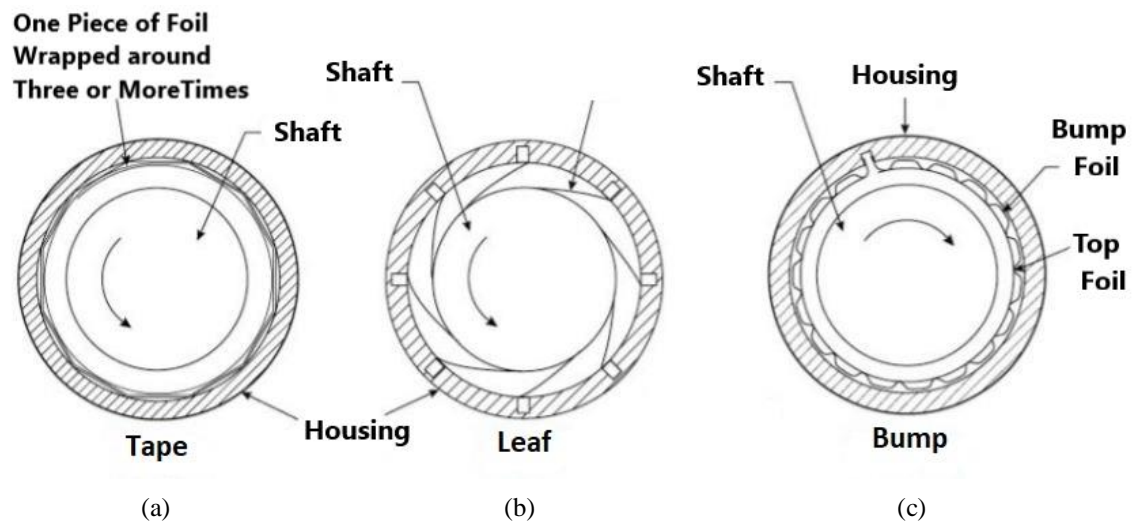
Schematic example of typical Generation I foil bearings with axially and circumferentially uniform elastic support elements: a) tape-type foil bearings b) leaf-type foil bearing and c) bump-type foil bearing [8]
